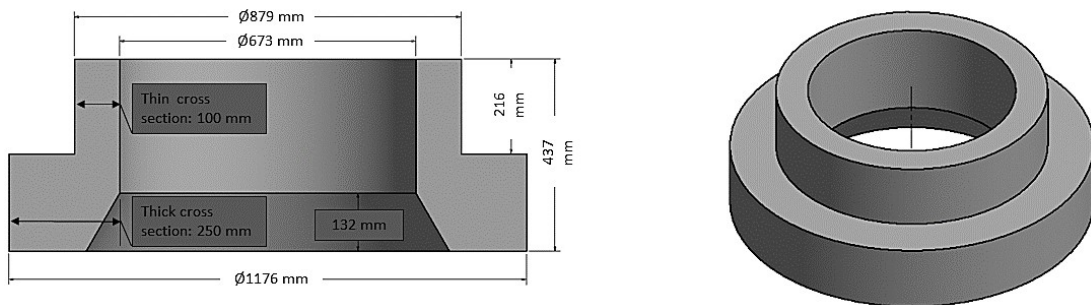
Dimensions of double cross section forged connector selected as experimental workpiece.
